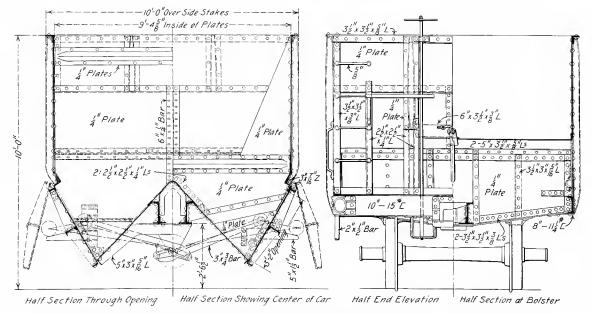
Cross Sections and End Elevation of All-Steel Side Dump Coke Car Shown in Fig. 305.
